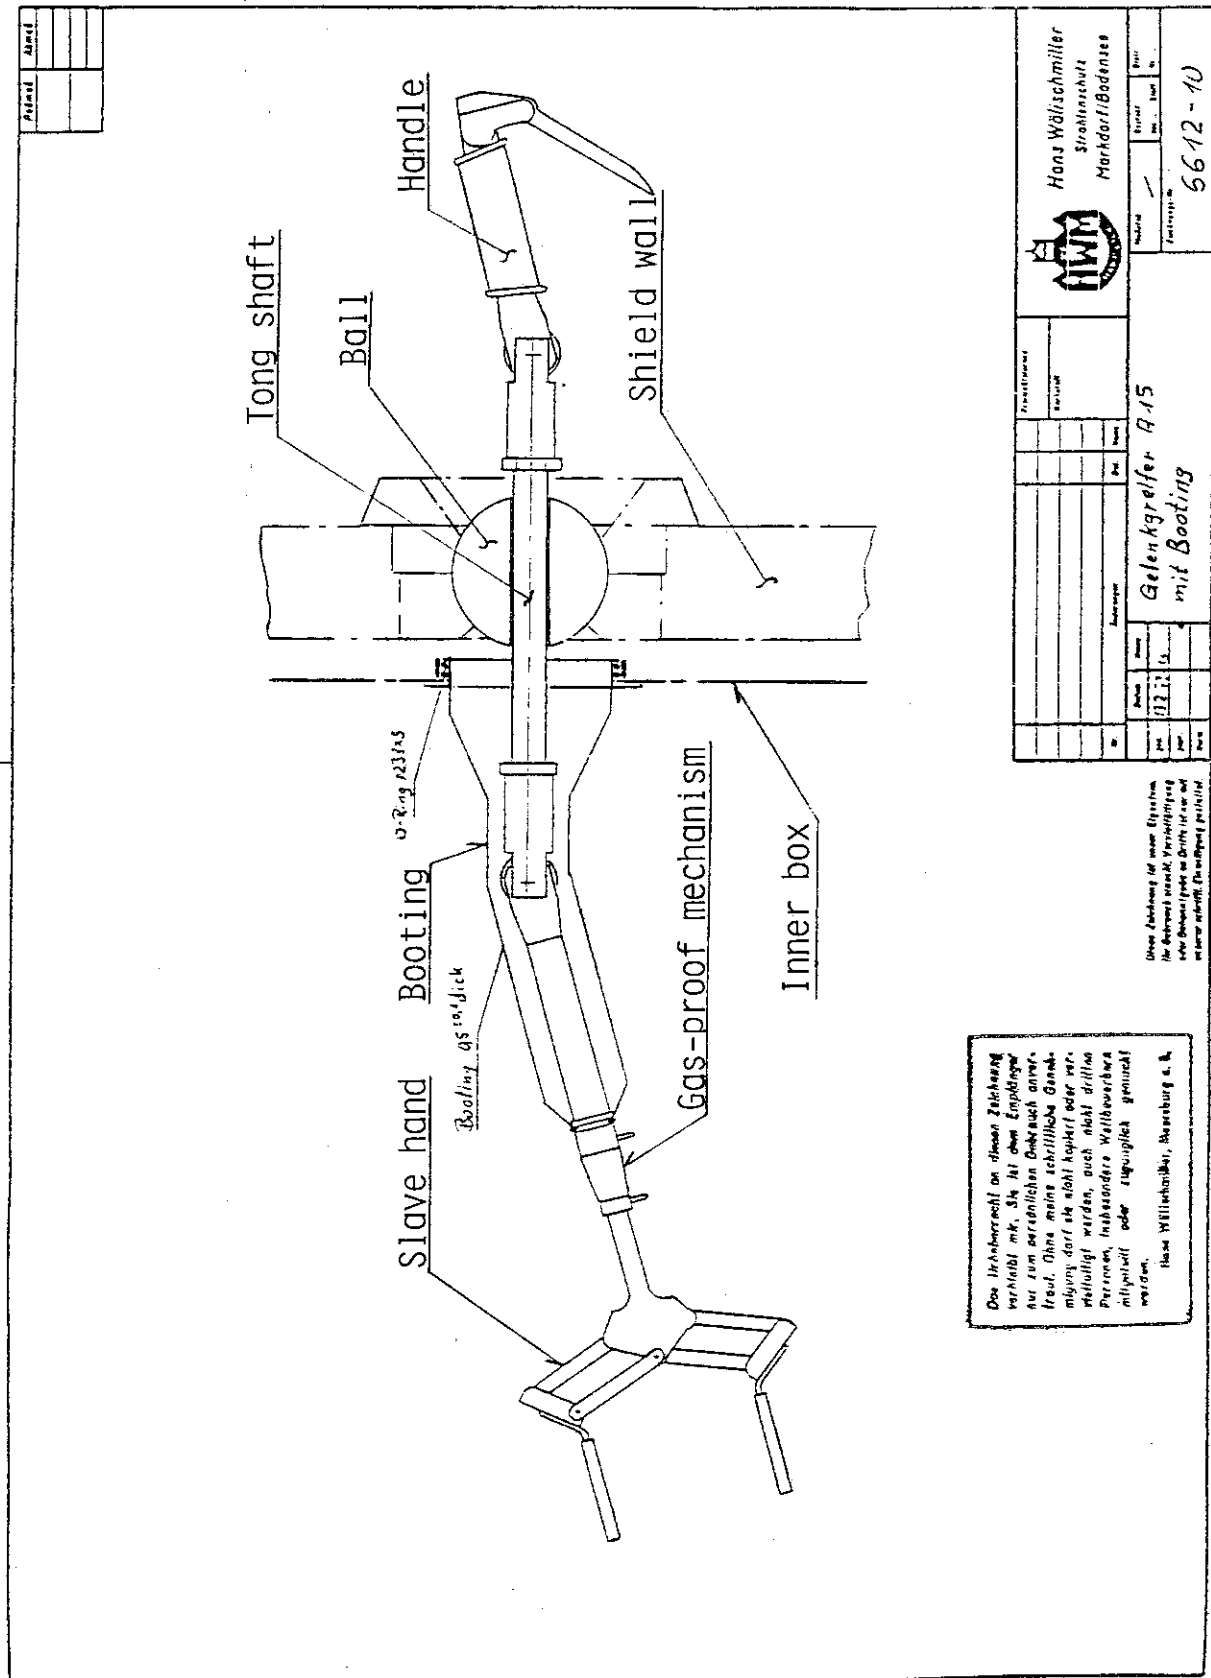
Handle rotation mechanism of the type A 15 ball-socket tong manipulator
